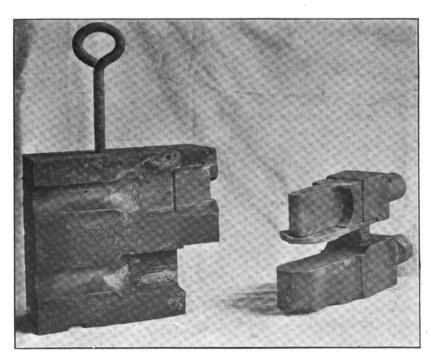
DIES AND PUNCHES THAT ARE USED FOR SCARFING AND WELDING
